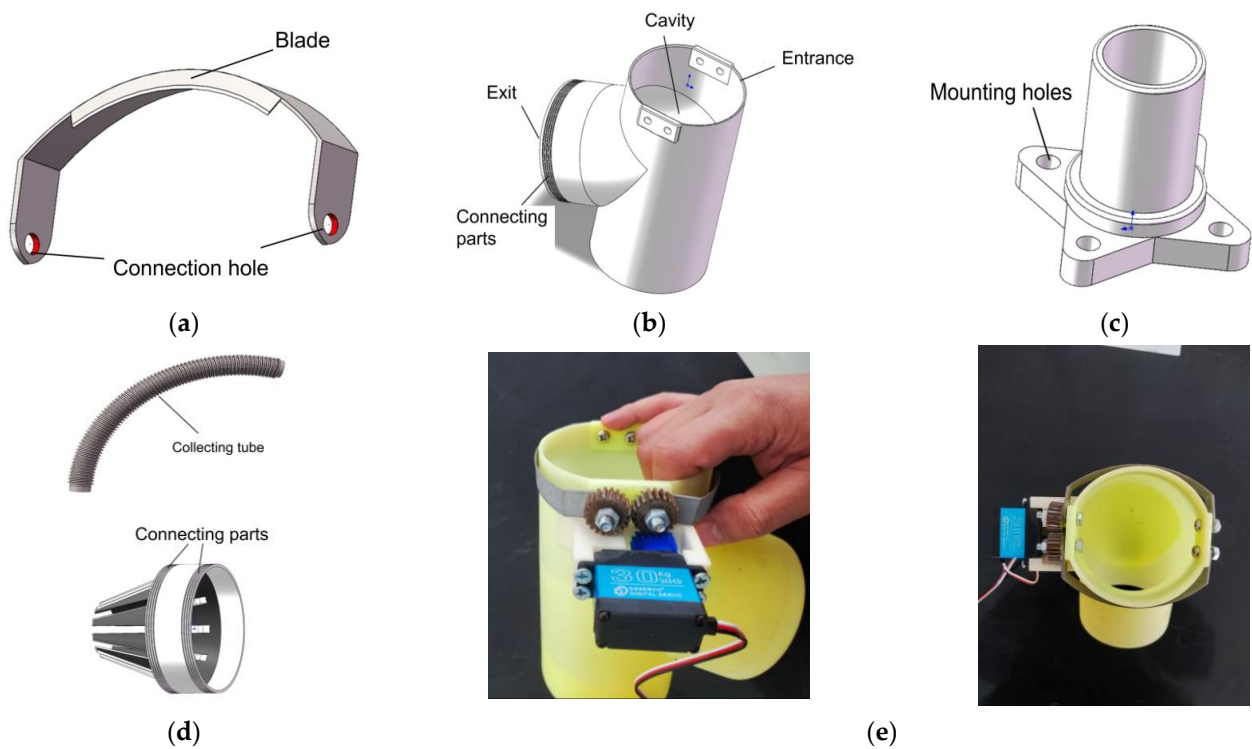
End-picker assembly diagram: (a) blade; (b) mold cavity; (c) connecting mechanism; (d) fruit-collecting mechanism; (e) transmission mechanism and assembly figure.
